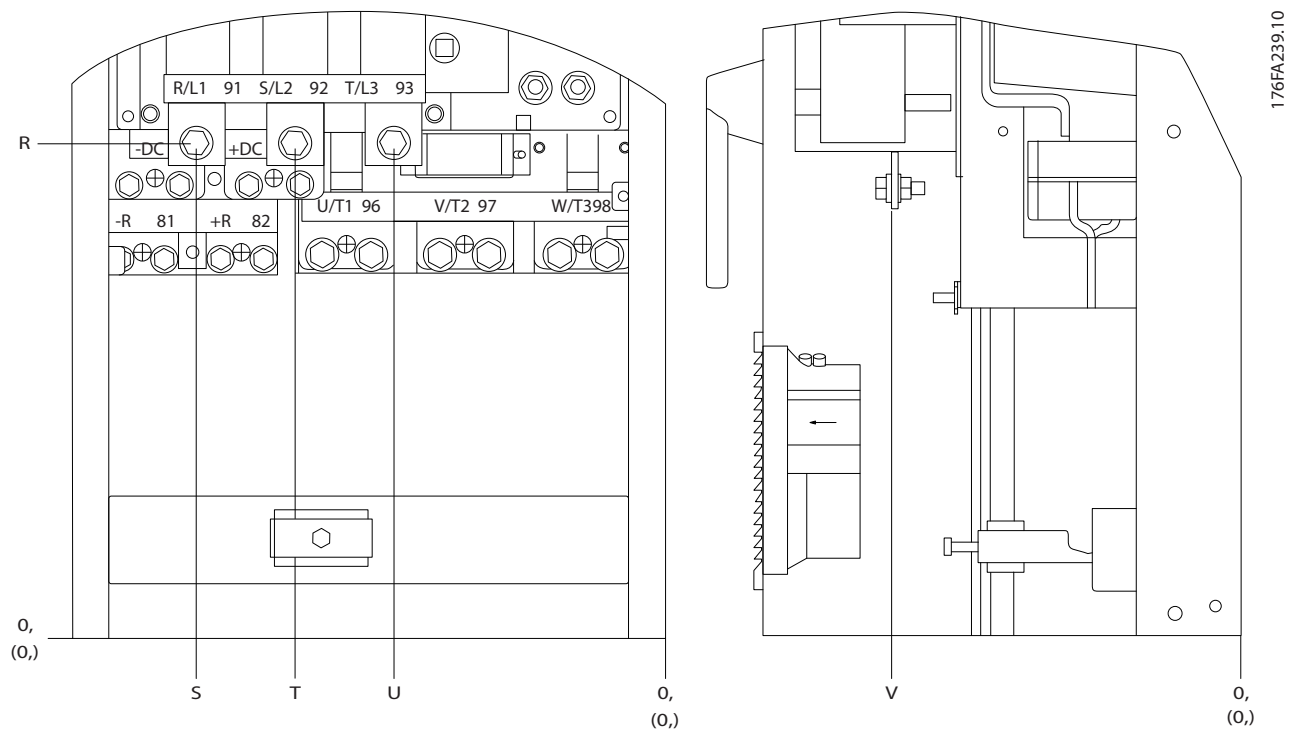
Position of power connections with disconnect switch, frame size D1 and D2
